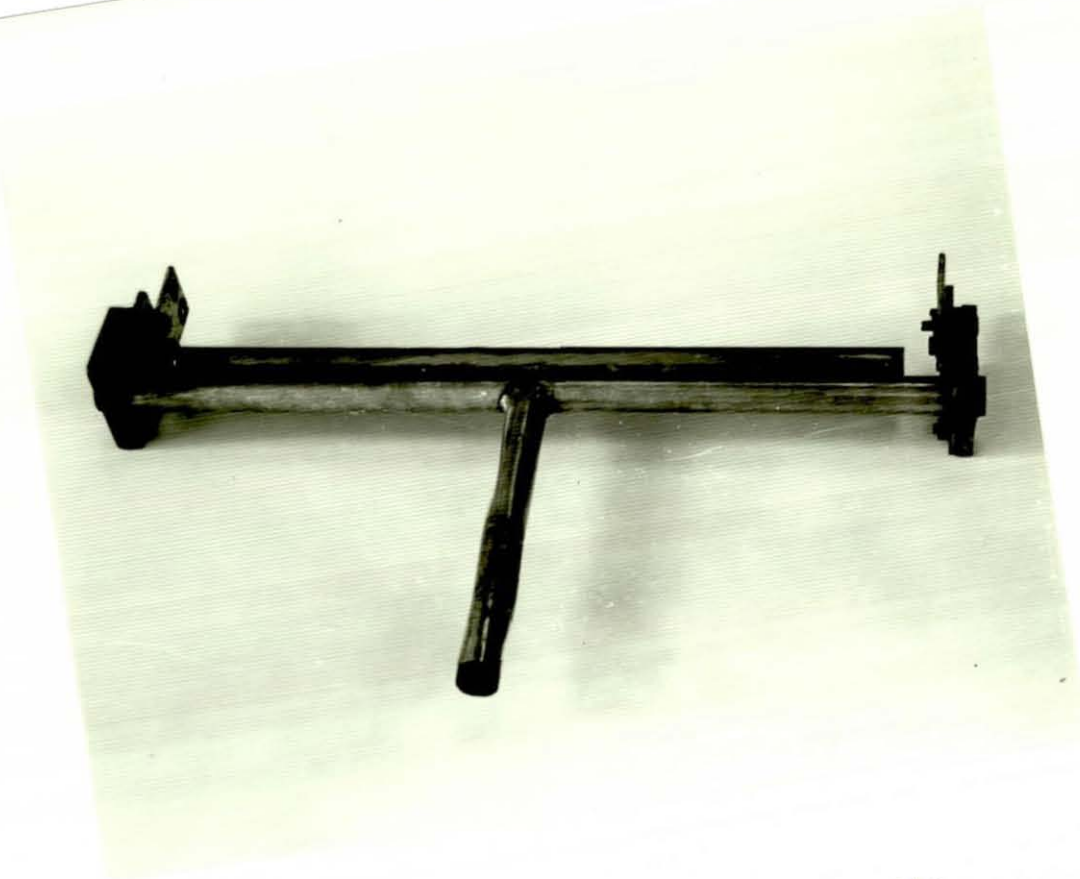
(a) Stainless Steel Yoke for tube Assembly
